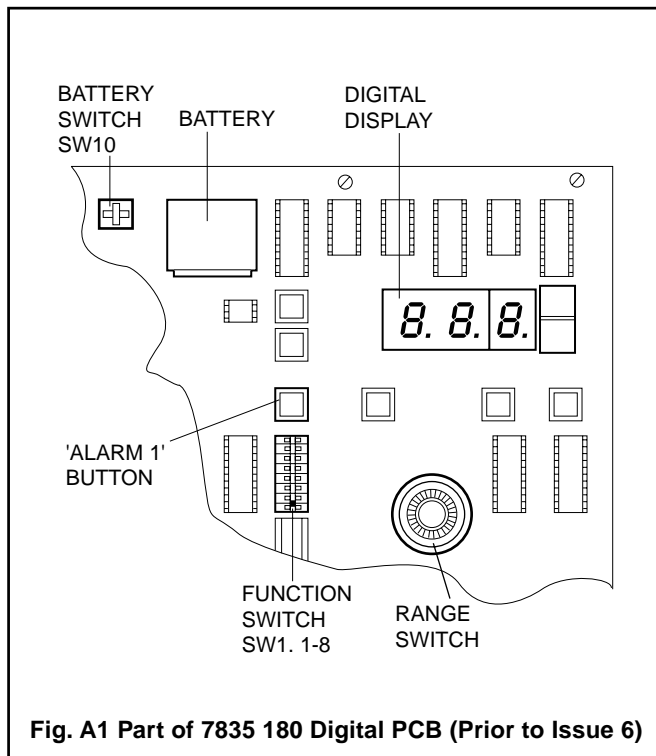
Part of 7835 180 Digital PCB (Prior to Issue 6)
